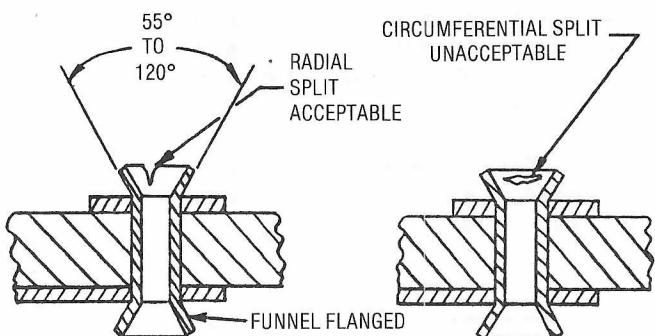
Mechanical Assembly of Eyelets and Terminals
